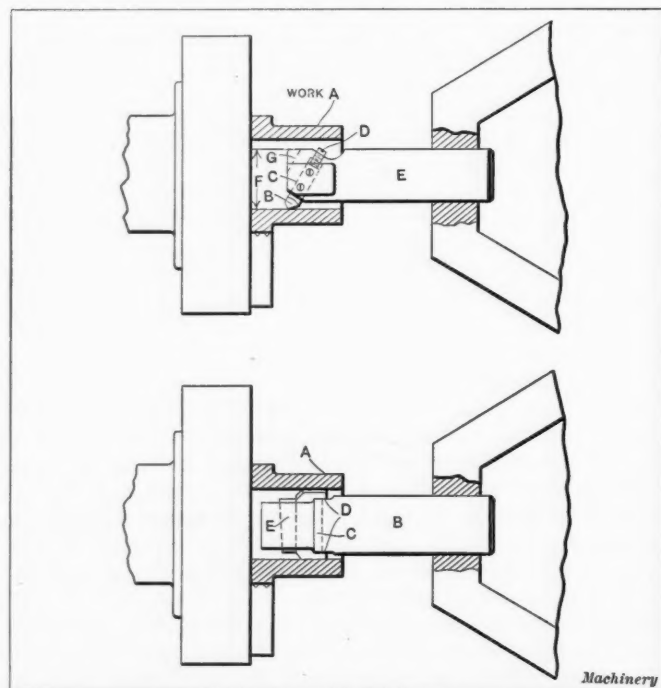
(Upper View) Boring-bar with Adjustable Cutter; (Lower View) Boring-bar with Double-ended Cutter
